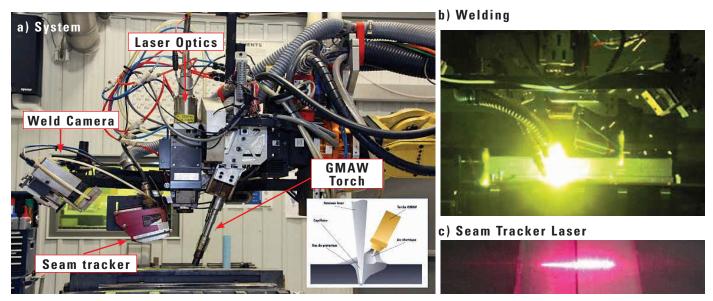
Novika Solutions' Hybrid Laser Arc Welding (HLAW) System.
